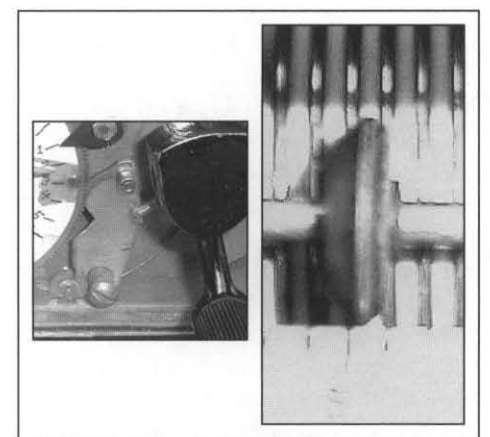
(left)—Close-up of the cam that stops the knob from turning.
